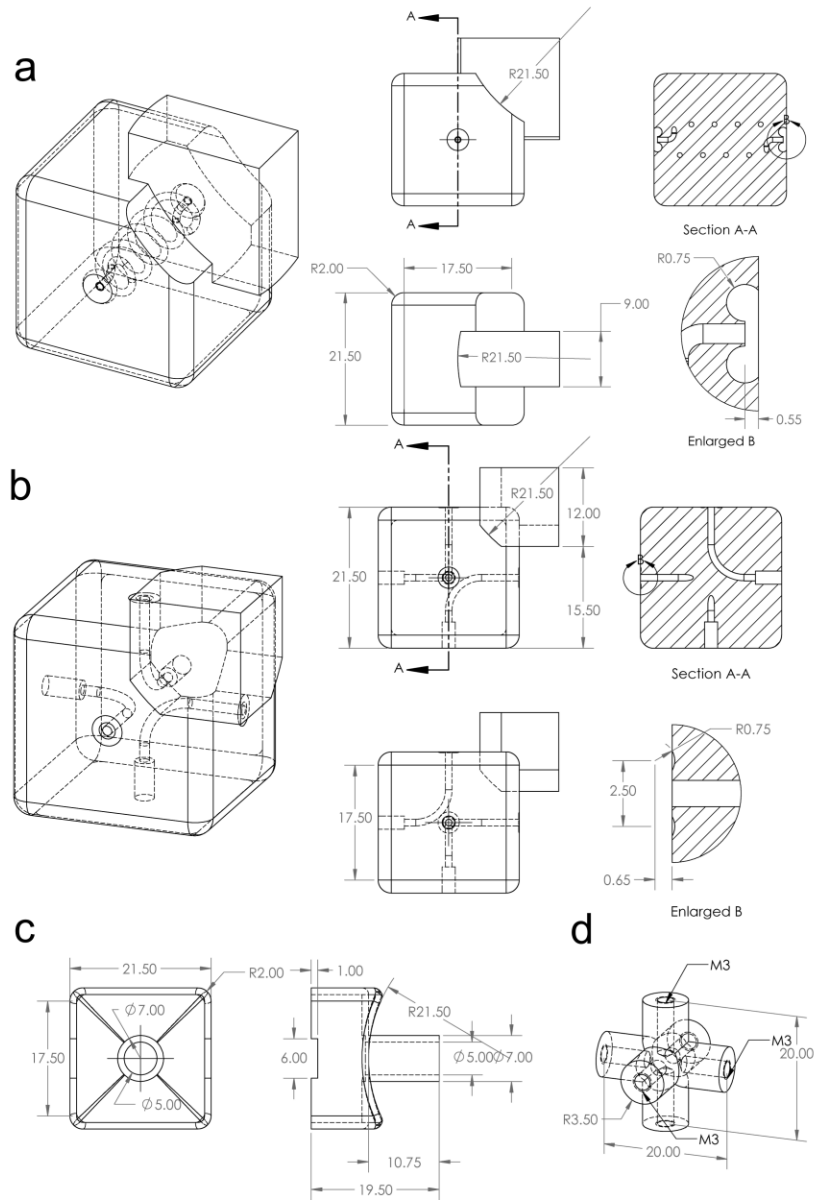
Dimensions of the major components of the microfluidic cube. (a). An edge block with a spiral channel. Right bottom: enlarged view of the O-ring embedding torus concave. (b). A corner block of 3-way inlets/outlets. Right bottom: enlarged view of the O-ring fitting torus concave. (c). A central block. (d). The cube core. All values are in mm.
